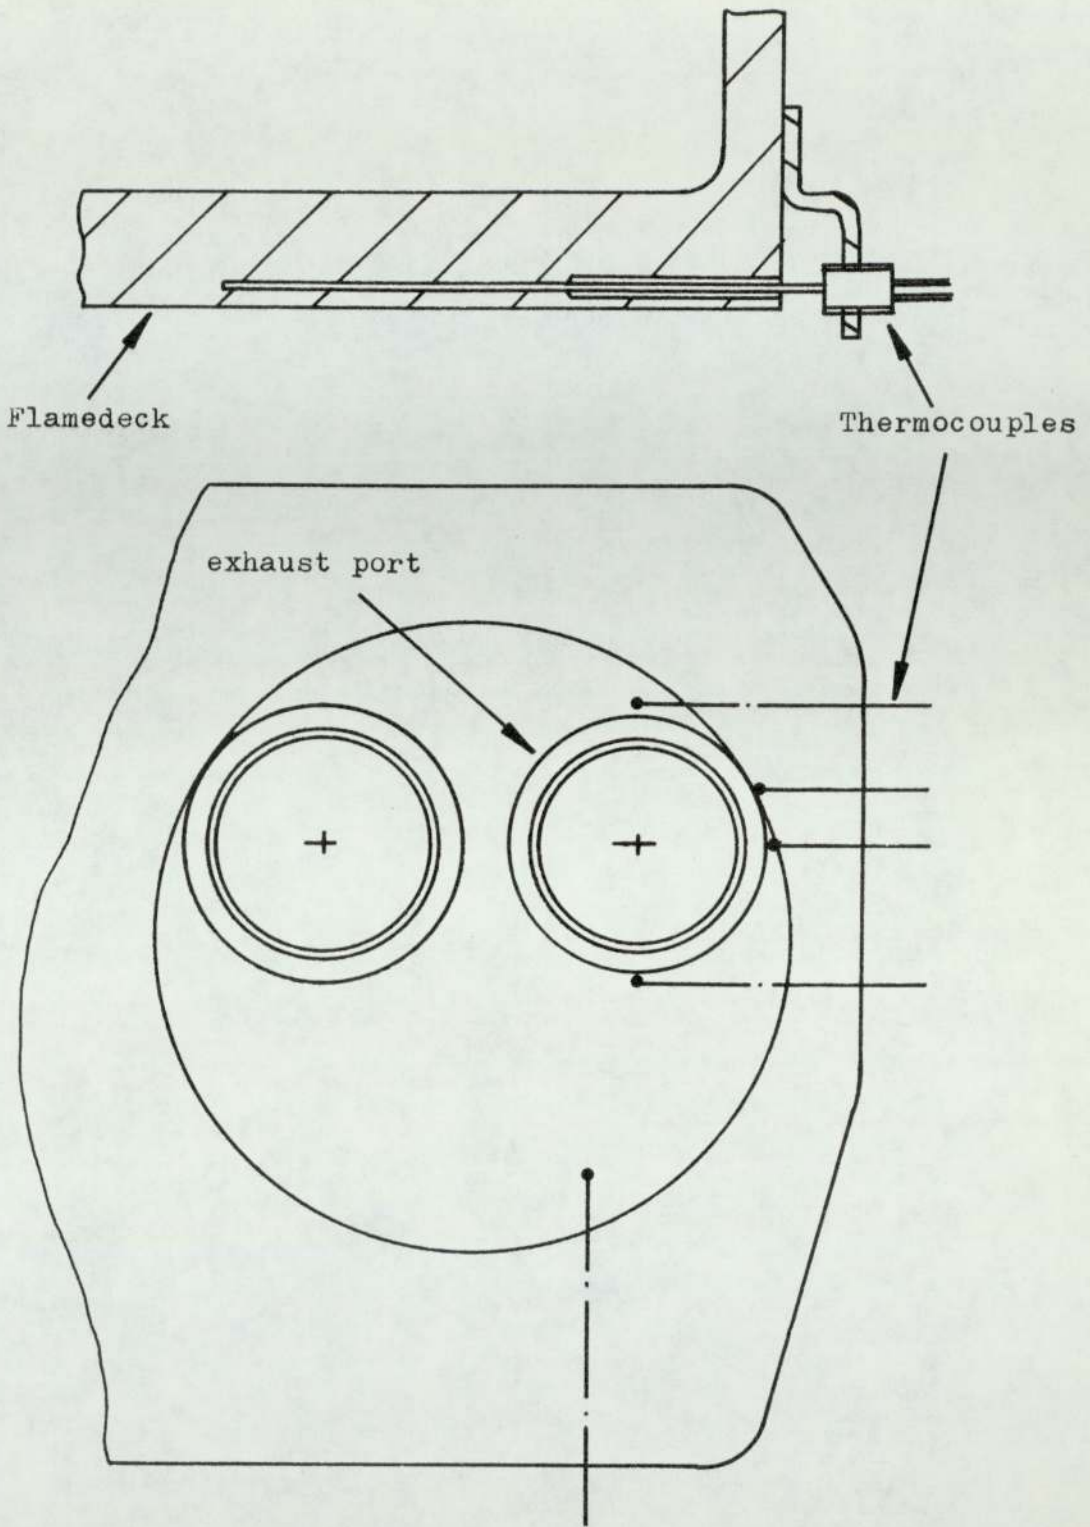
, Installation and location of the thermocouples in the cylinder head flamedeck.
